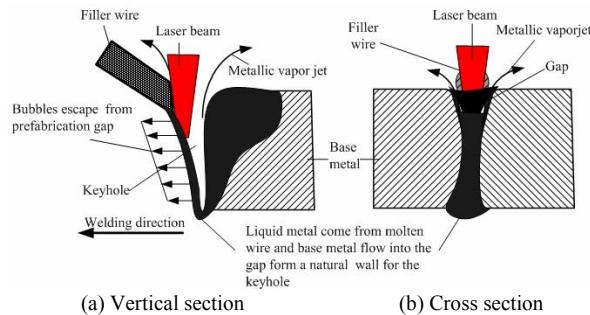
Gas cavity eliminations in laser butt welding with a gap of 0.4 mm.
